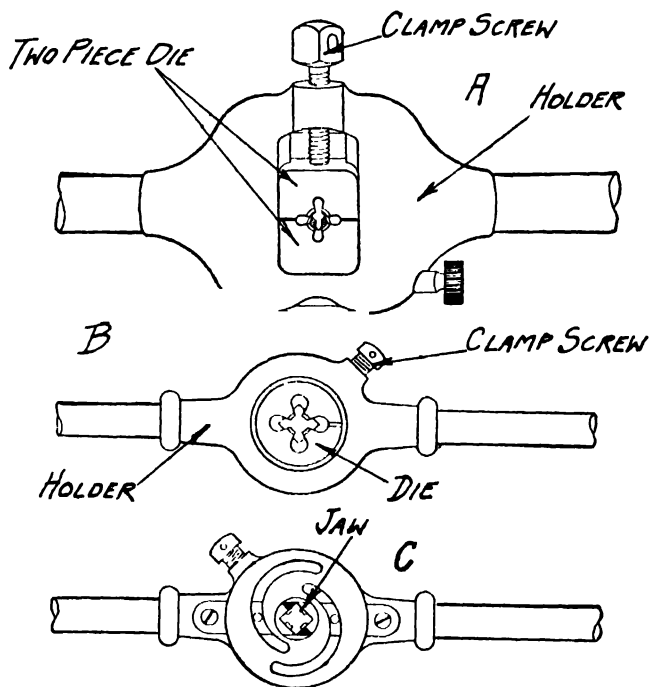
Showing Holders for One and Two-Piece Thread Cutting Dies.
